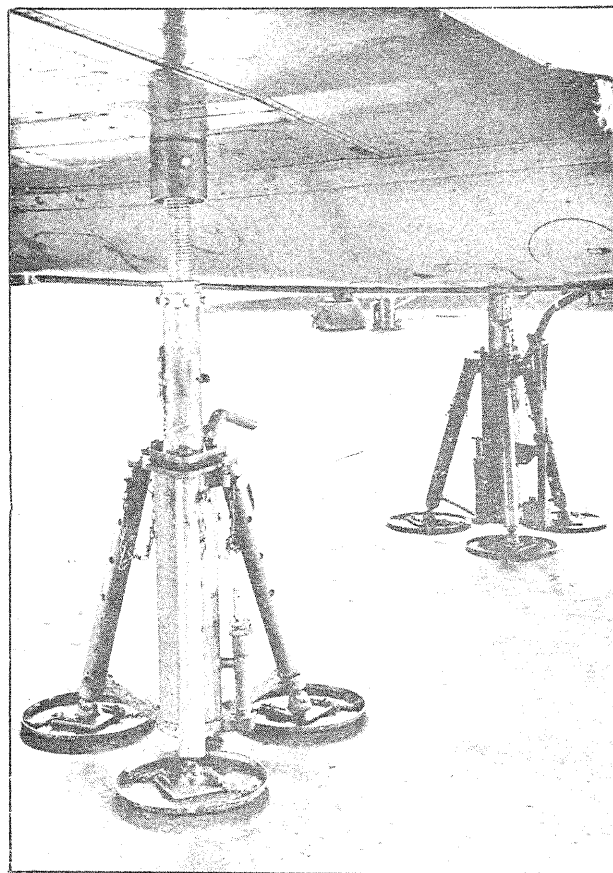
VIEW OF KNIFE EDGE AND JACK SUPPORT
